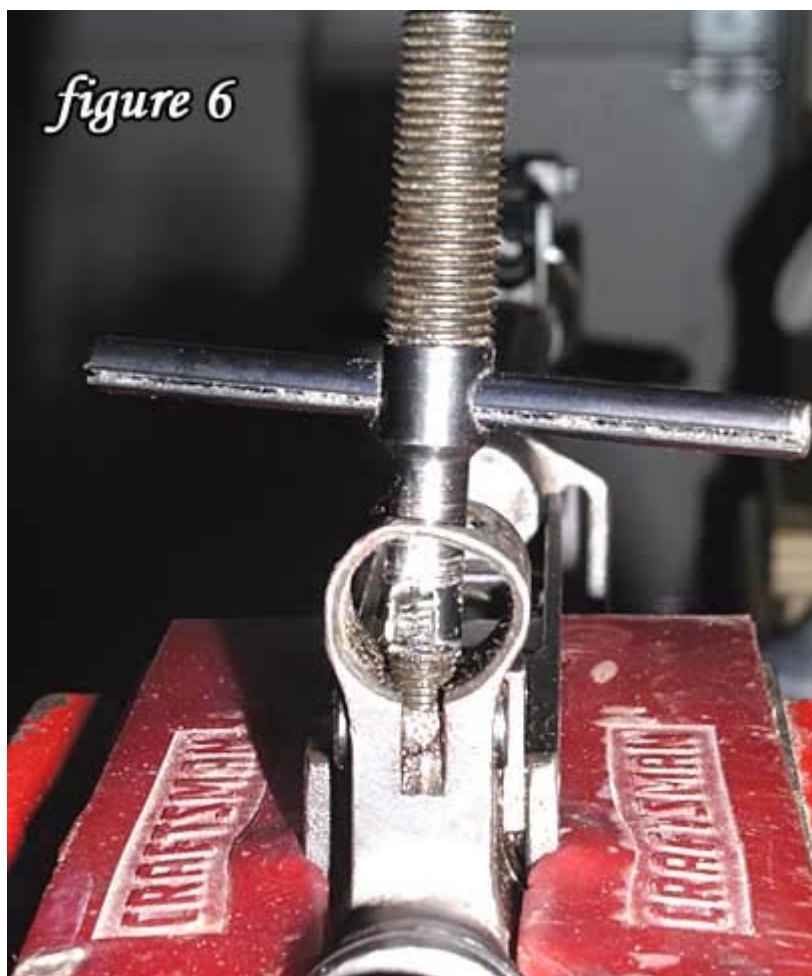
With the hole moved to make blade accessible, remove the blade with C-tool
